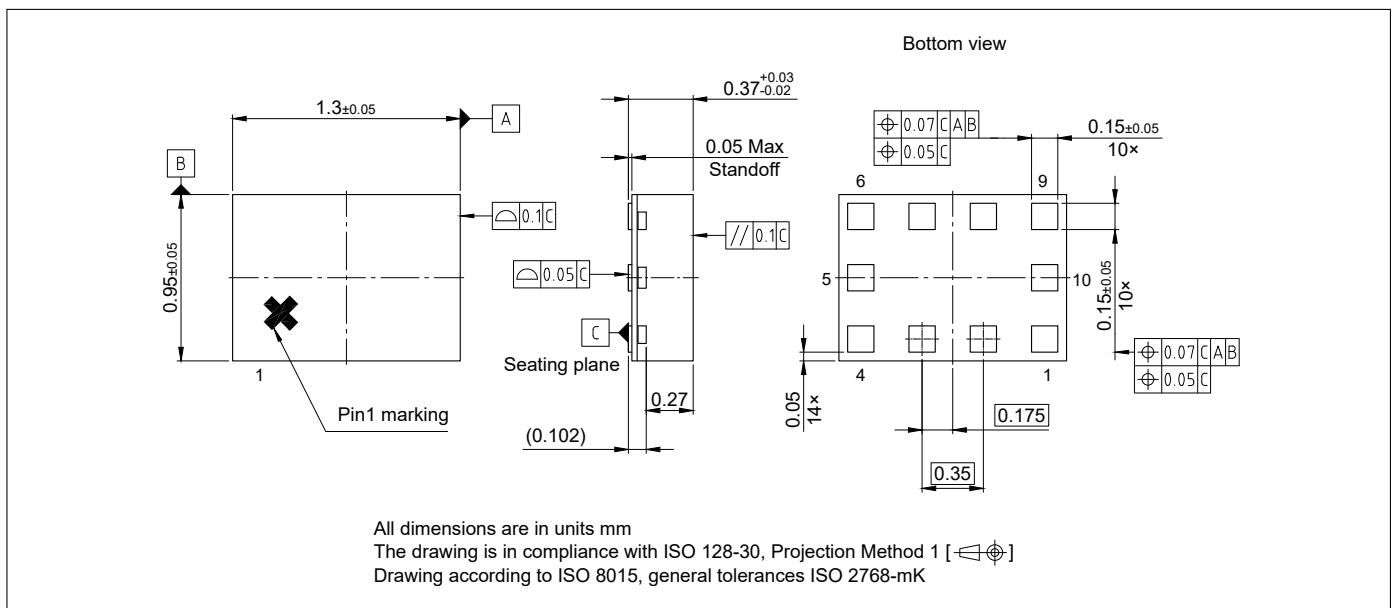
TSNP-10-10 package outline (top, side and bottom views)
